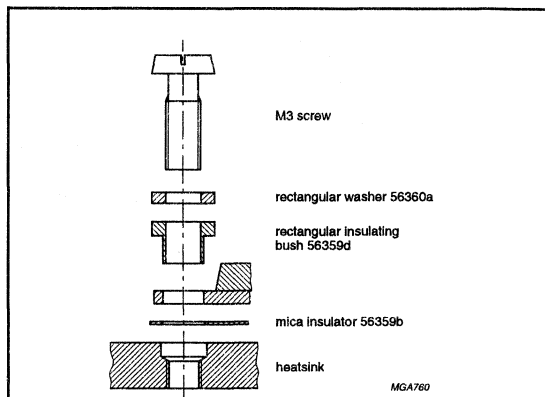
Insulated screw mounting with rectangular washer into tapped heatsink.
